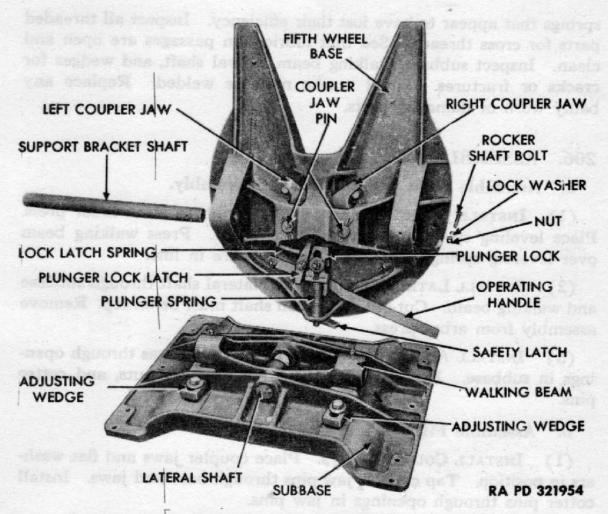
Fifth Wheel Base and Subbase Assemblies
